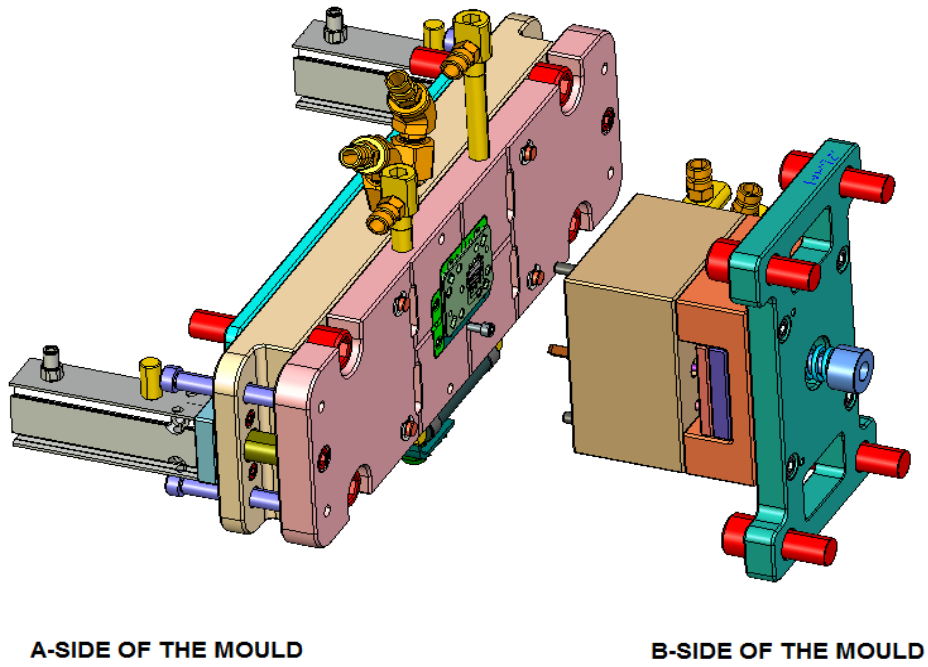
Photograph of the mould assembly showing the magnified picture of the A and B side of microneedle insert.
